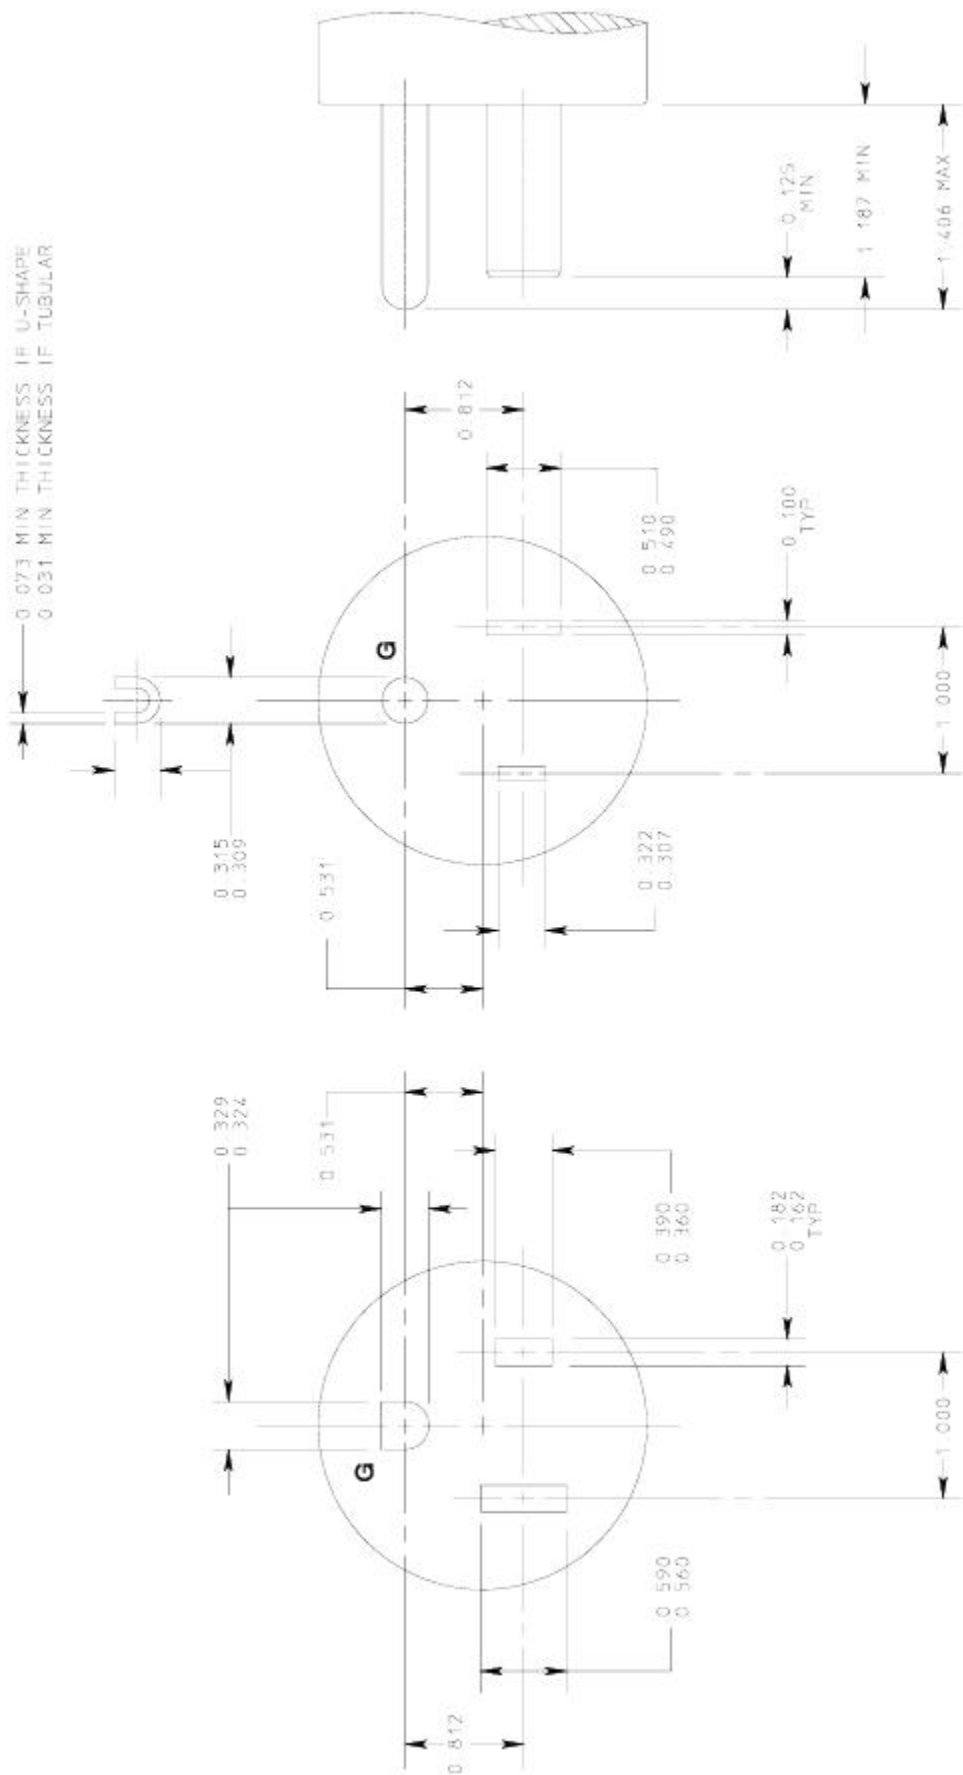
ALT (ALTERNATE CONSTRUCTION - CANADA)
